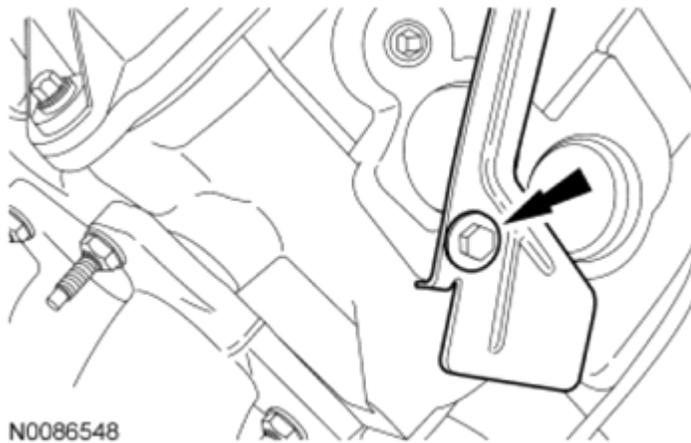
Locating Bolt And Intake Manifold Vacuum Tube Support Bracket
